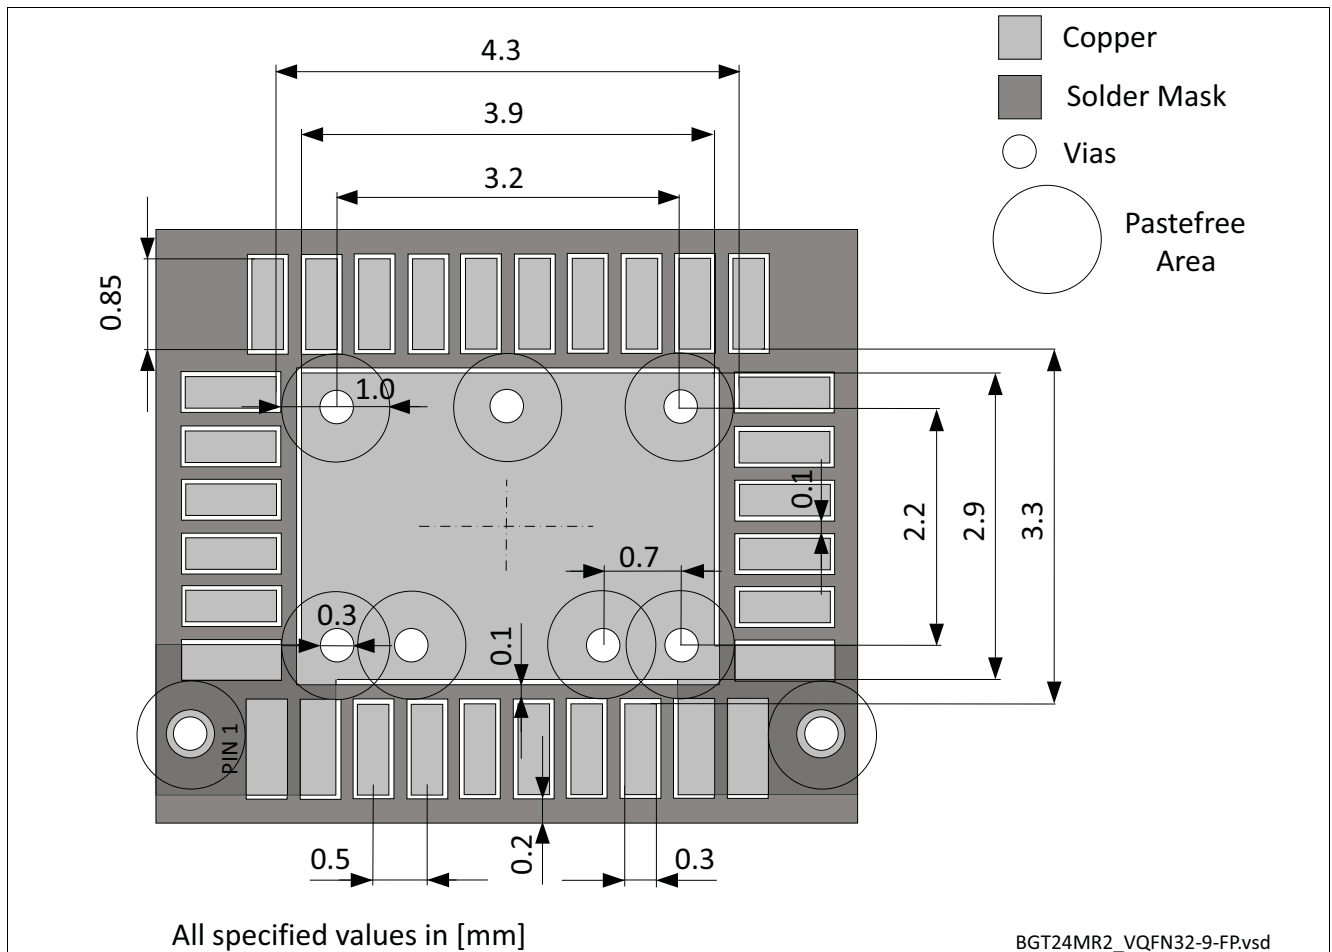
Recommended Footprint and Stencil Layout for the VQFN32-9 Package
